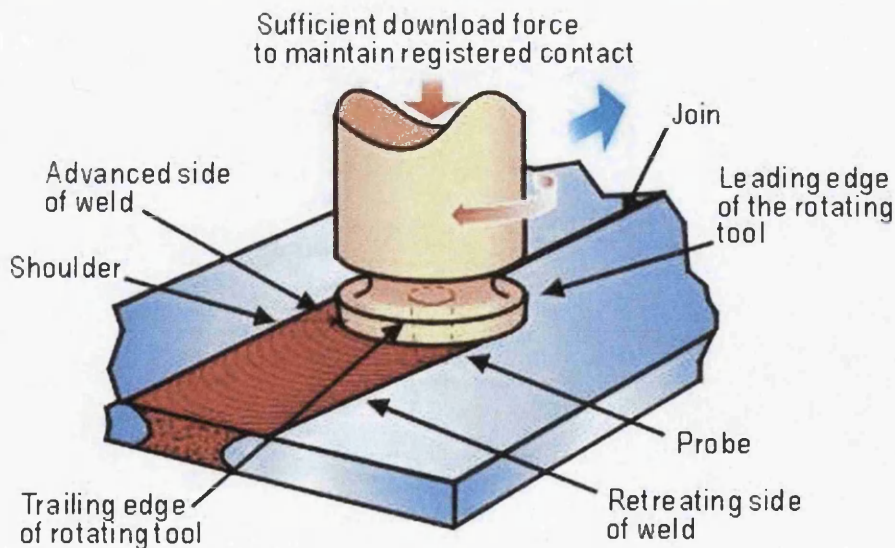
An illustration of the friction stir welding technique.
